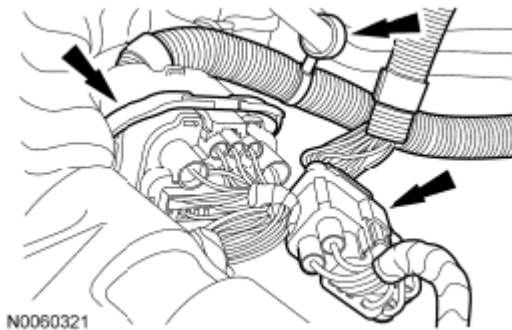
Locating Electrical Connectors And Wiring Harness Retainer
